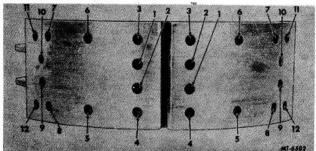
Sequence in Securing Brake Block Lining to Shoe
